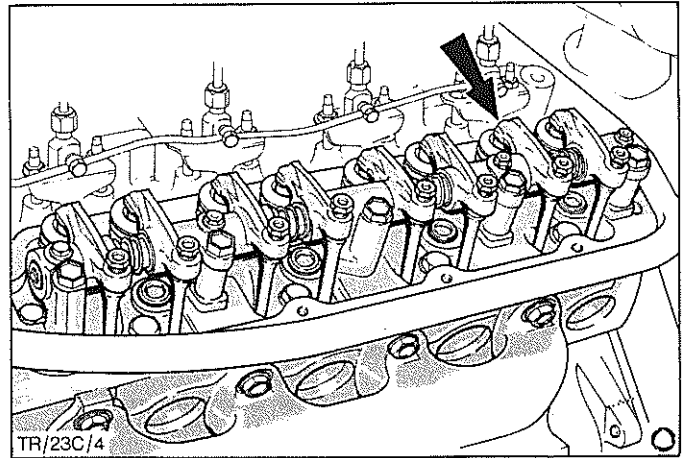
Set engine to No.1 piston on TDC. No.7 valve rising.
